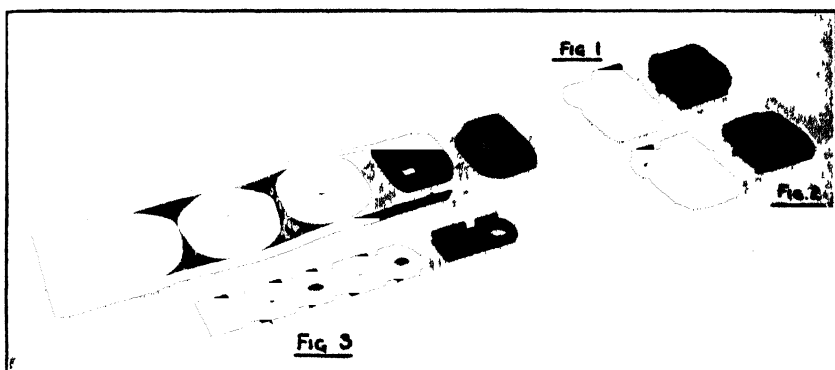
Cast iron carrier and base front and rear views. Fig. 2. The redesigned carrier and base. Fig. 3. Progressive punching and forming operations.
